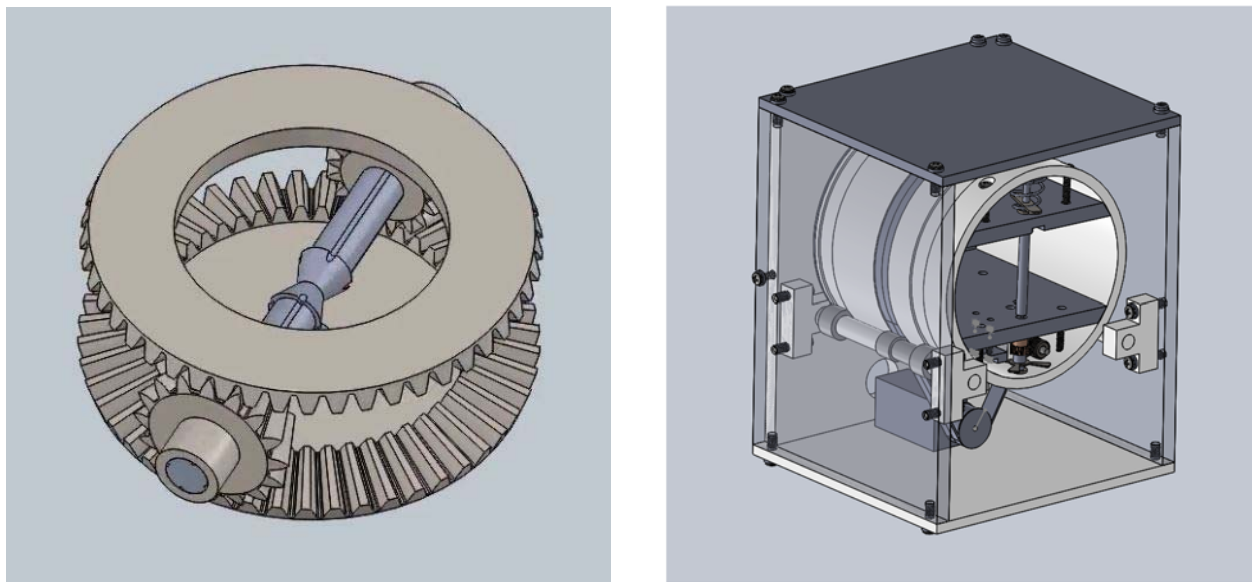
CAD Assembly of the Differential and Electronic Differential located within its housing.
